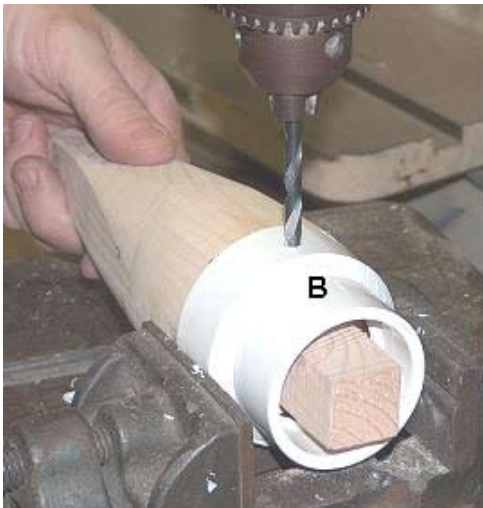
Dibble tip and reducer (B) being drilled for nail assembly.
